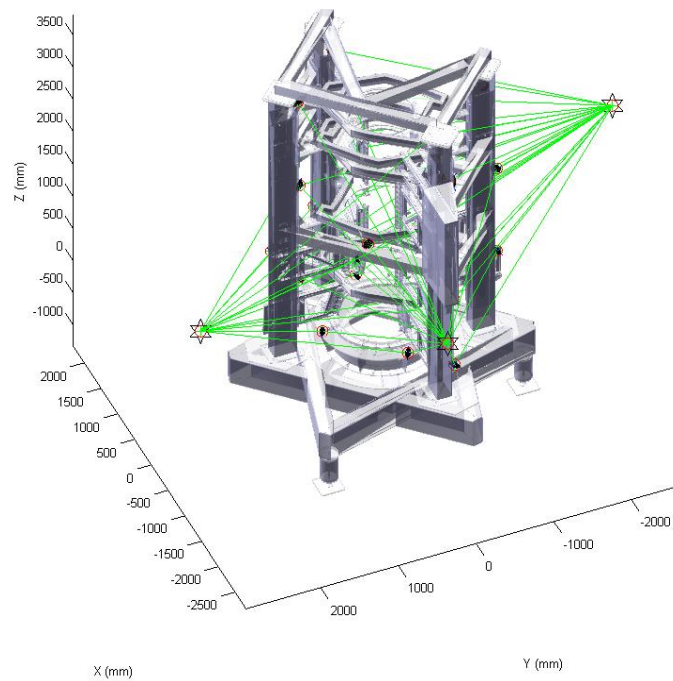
Optimised laser tracker positions (stars) for SML1 assembly.
